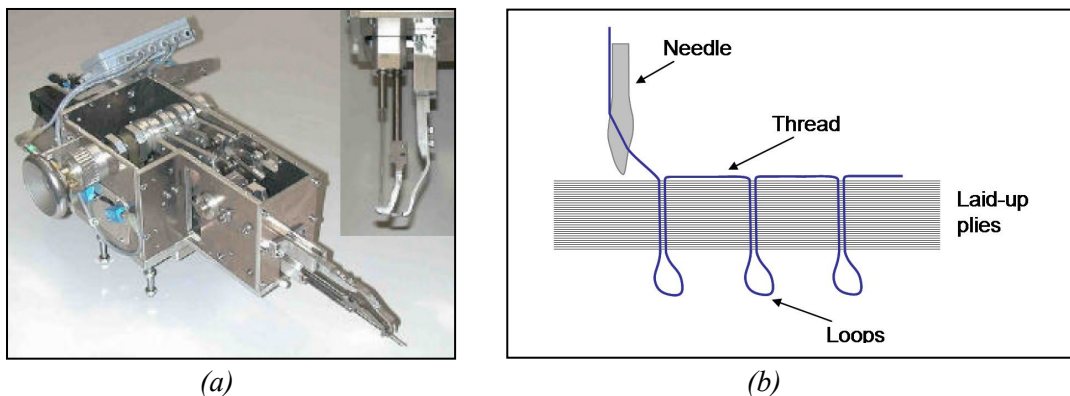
(a) *Tufting head for conventional CNC machines, from [51]
